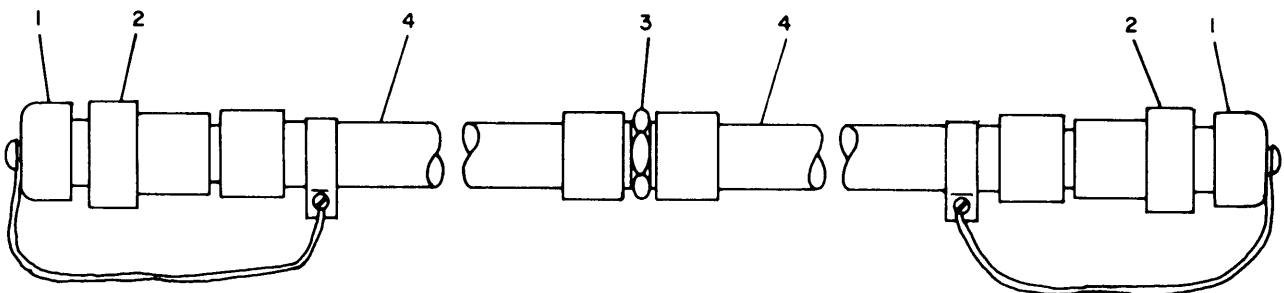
Adapter Assembly (Part No, 7469-1 Only), Component Location
